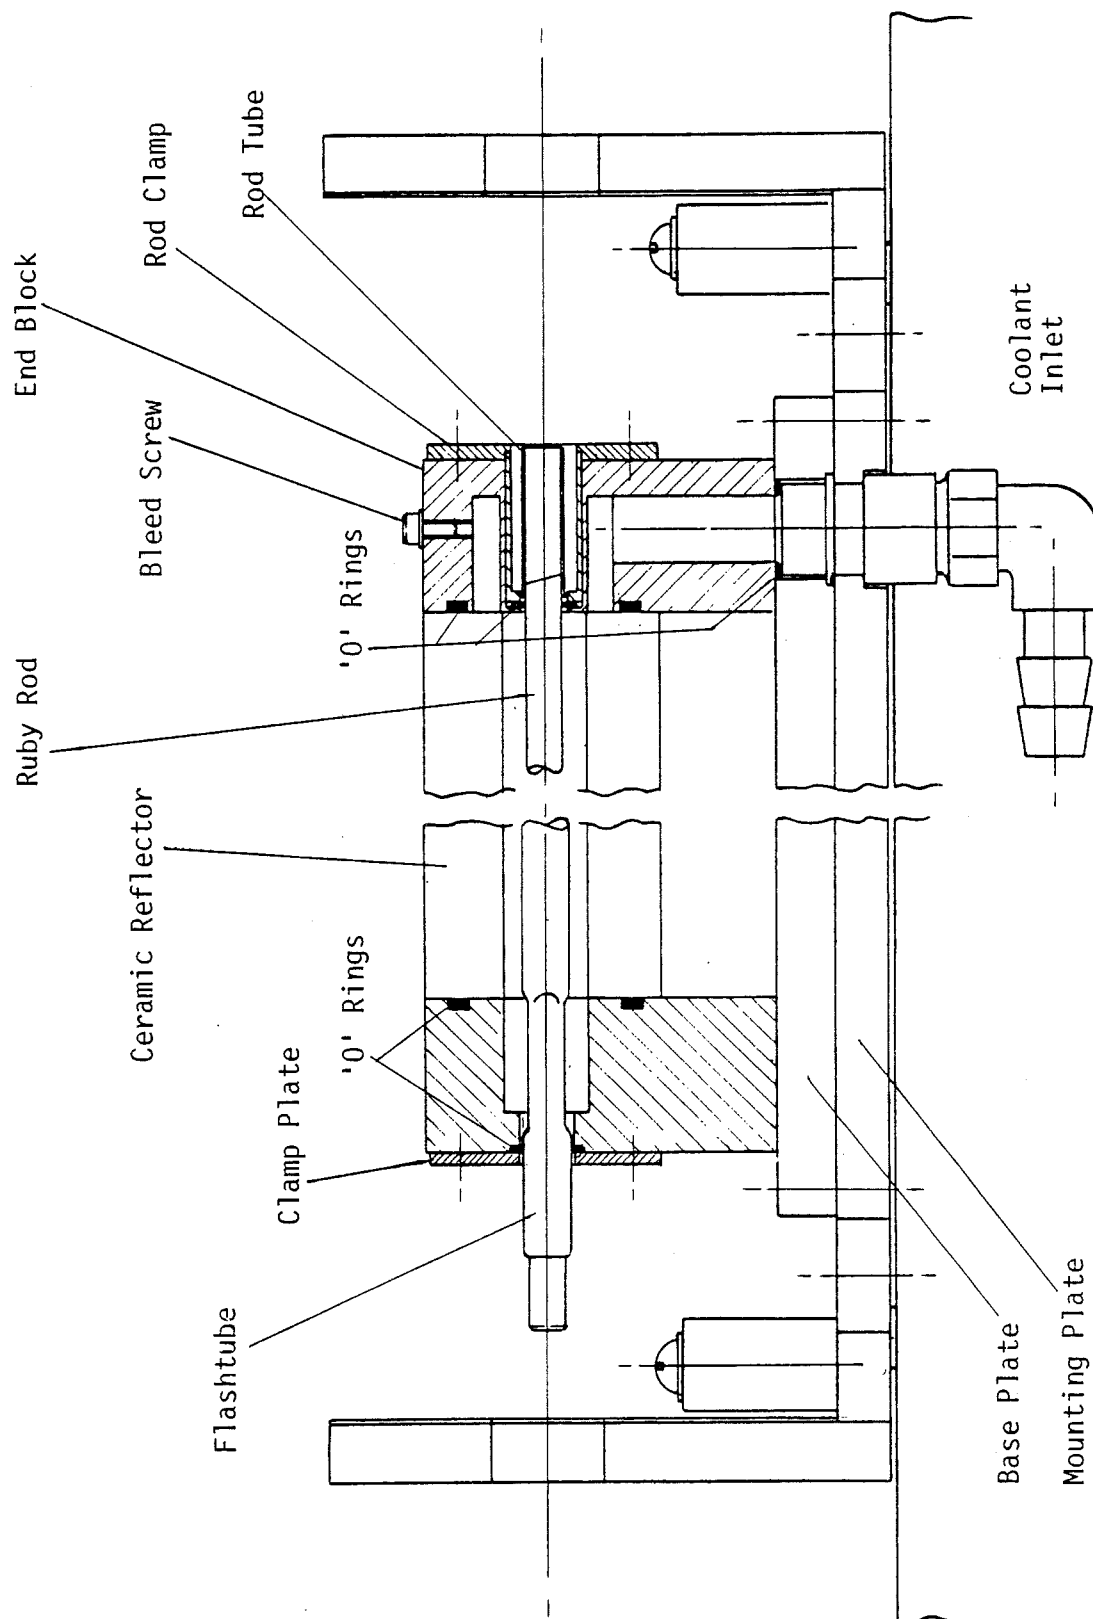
CROSS-SECTIONS OF LASER HEAD ASSEMBLY SHOWING FLASHTUBE (LEFT) AND ROD (RIGHT)
